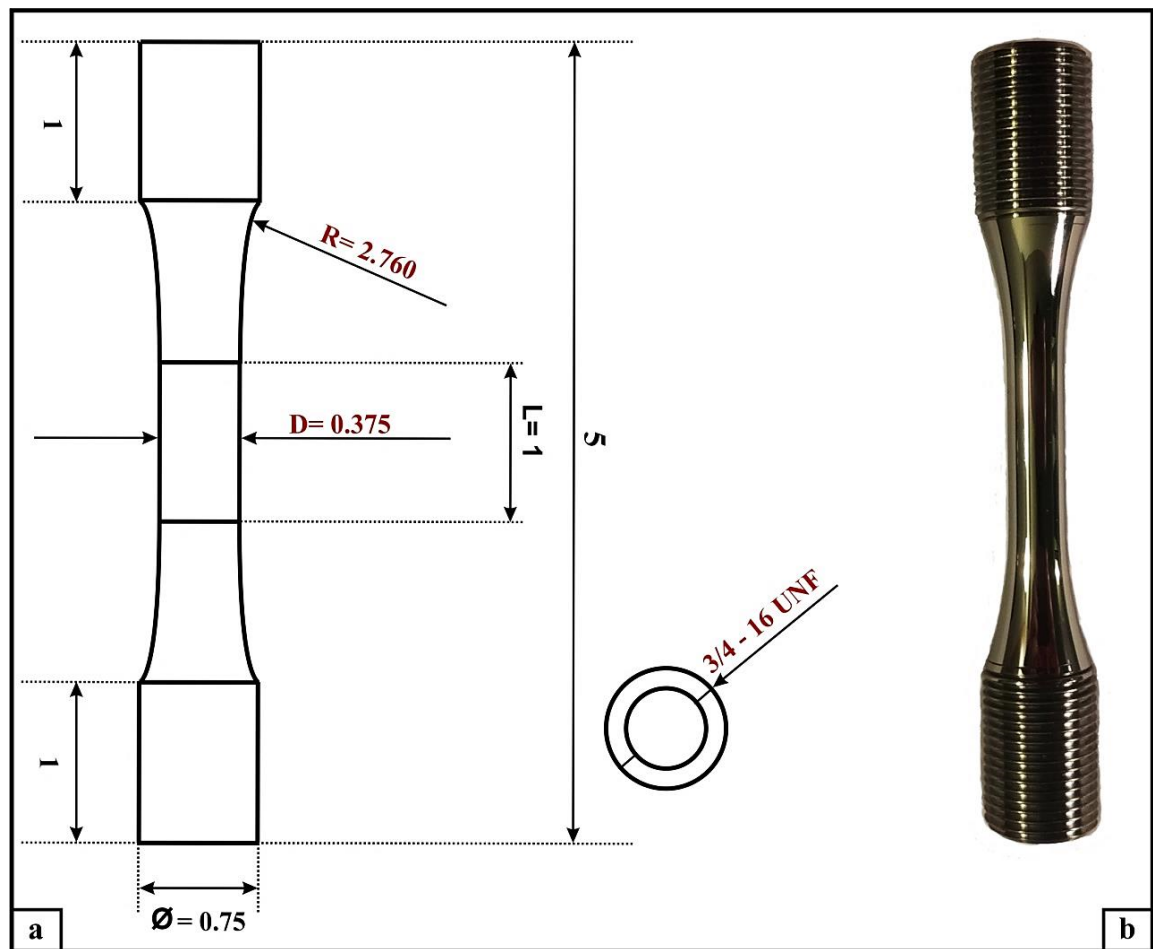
(a) Sketch of the standard cylindrical fatigue specimen (all dimensions are in inches (in.)) (ASTM E466, 2007), (b) Machined and polished fatigue sample
